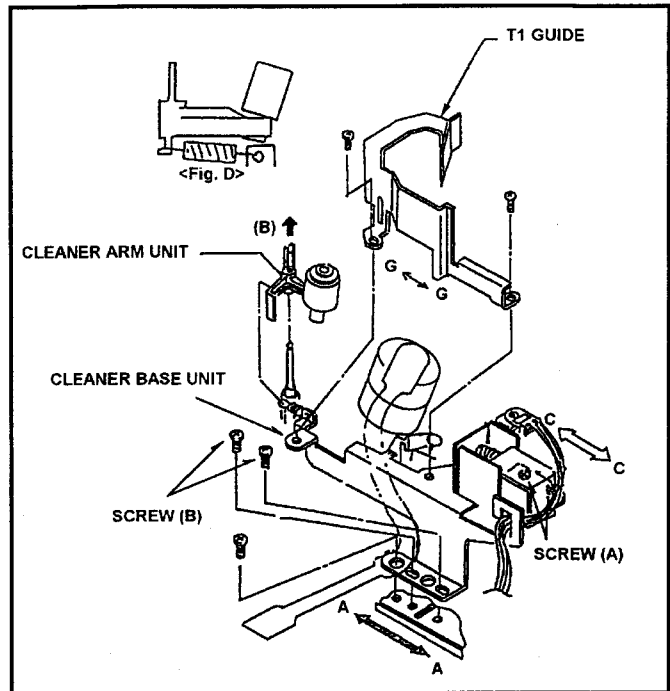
Cleaner Solenoid Position Adjustment
